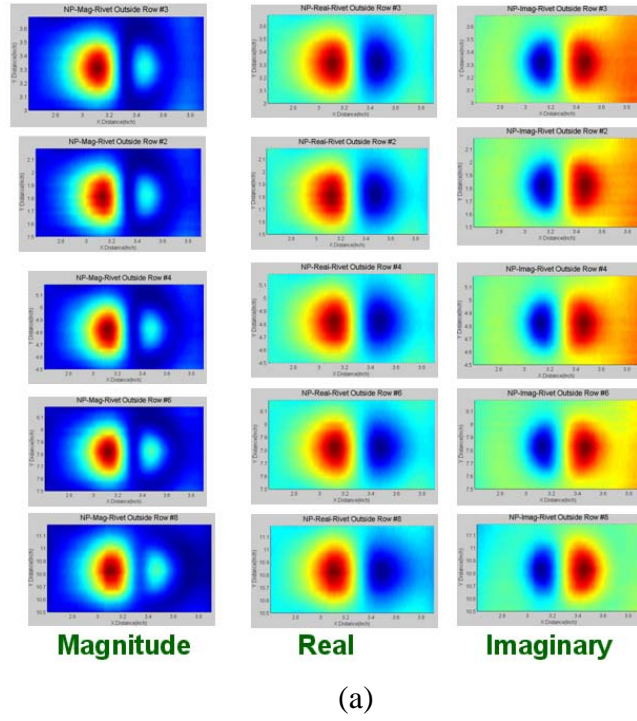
Images of Fasteners with Different Crack Dimensions- (from top to bottom)
